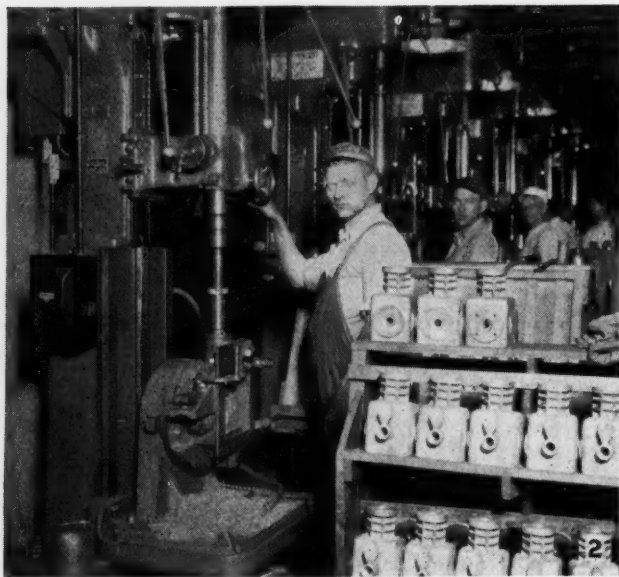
The piston holes and crankshaft holes in the compressor bodies are machined to size in these drilling machines.
